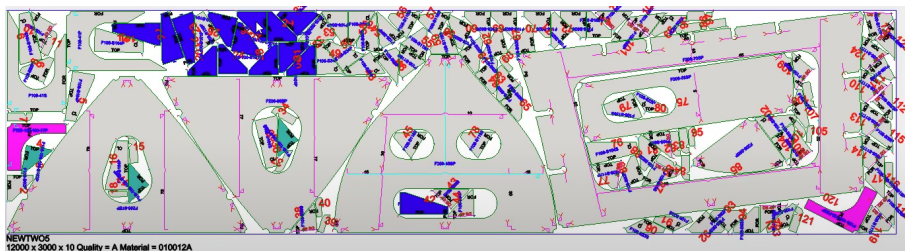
The layout of element arrangement in Aveva Nesting [5]
